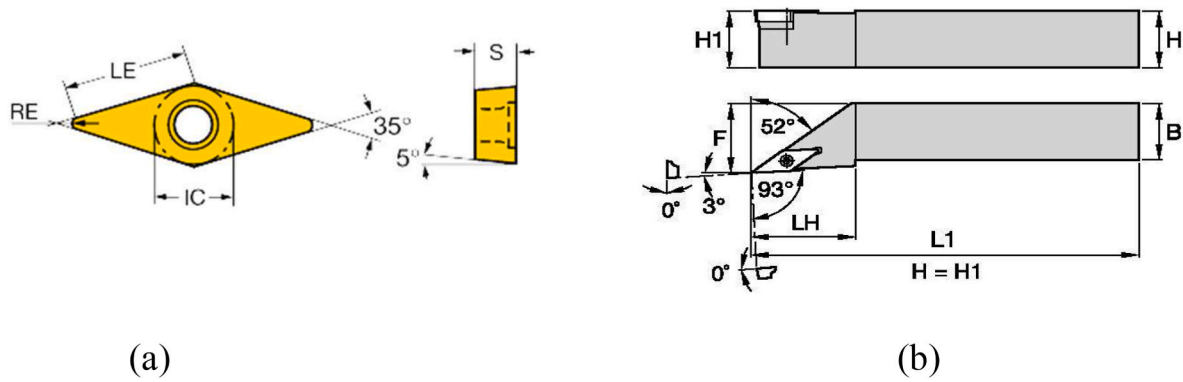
(a) VBMT 160404 insert; (b) SVJBR 2020K16 tool holder.
